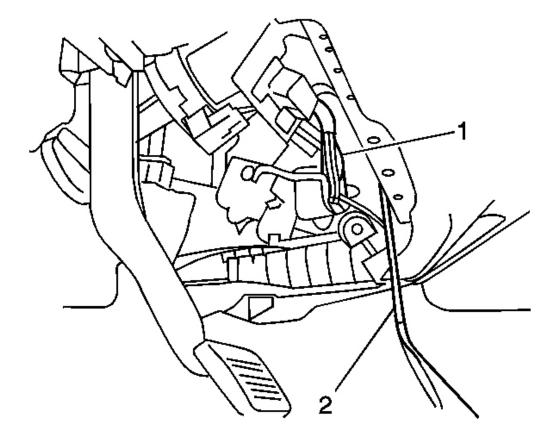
View End Cover Trim Panel Courtesy of GENERAL MOTORS CORP.
